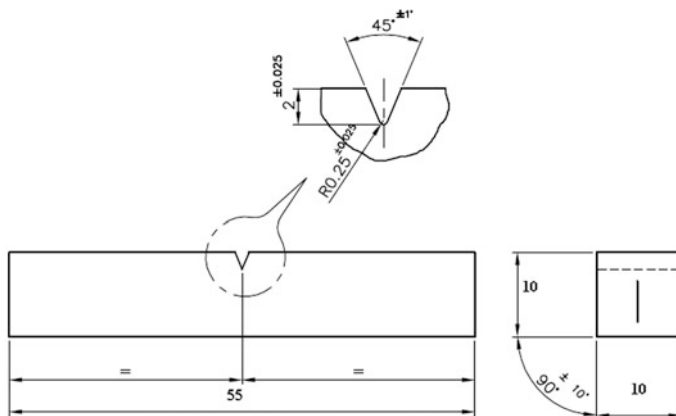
Charpy V-notch specimen drawing with all dimensions in mm
